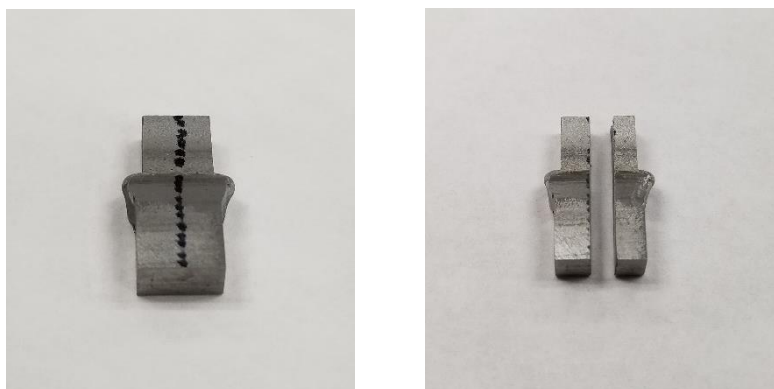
Precision cut of welded molybdenum sample after partial removal of expulsion region.
